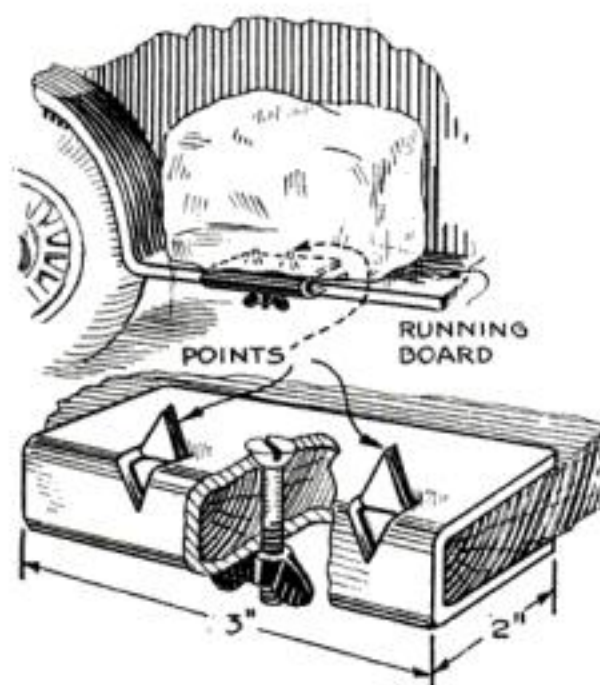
Sheet iron, bent over running board and bolted down, makes a good ice carrier.
